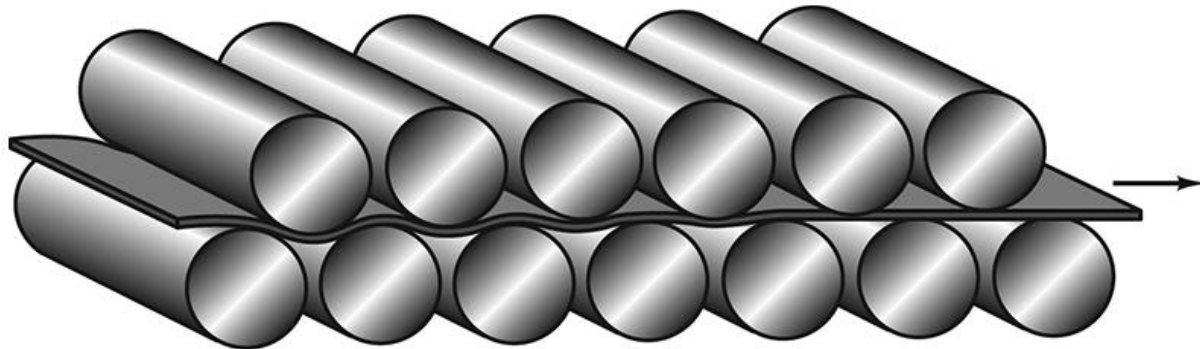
Method of straightening rod or sheet by passing it through a set of straightening rolls. For rods, another set of rolls is used to provide straightening in the transverse direction.
